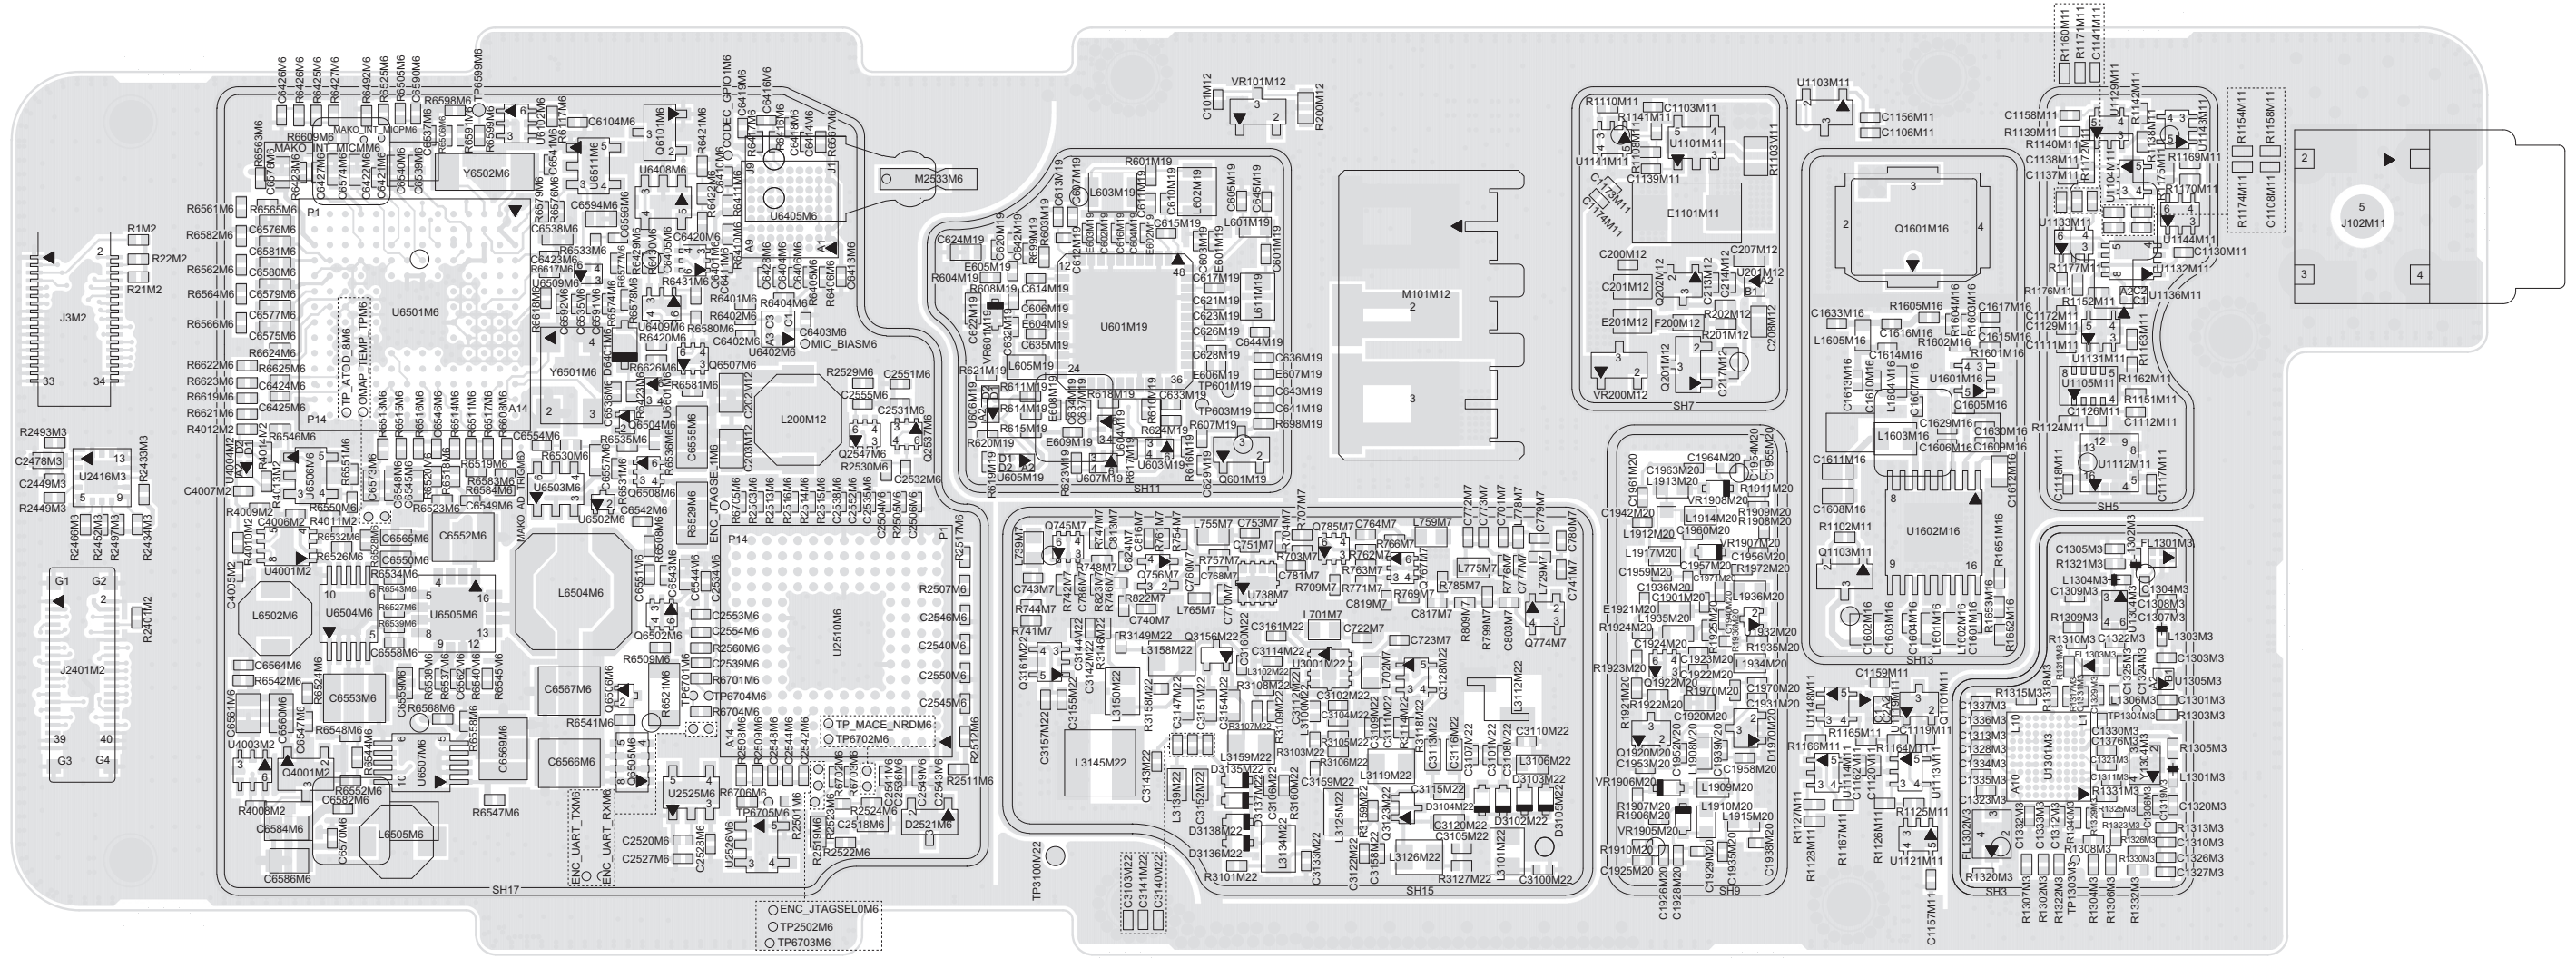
Transceiver (RF) Board Layout – Bottom Side
